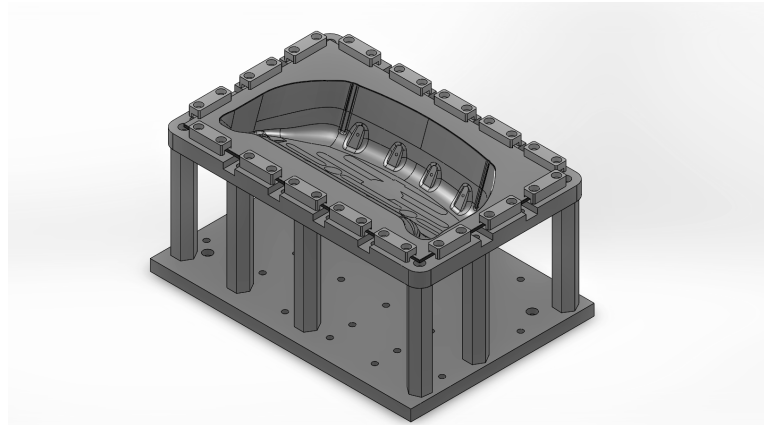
CAD model of the SPIF forming rig, showing a formed component secured in the frame.
